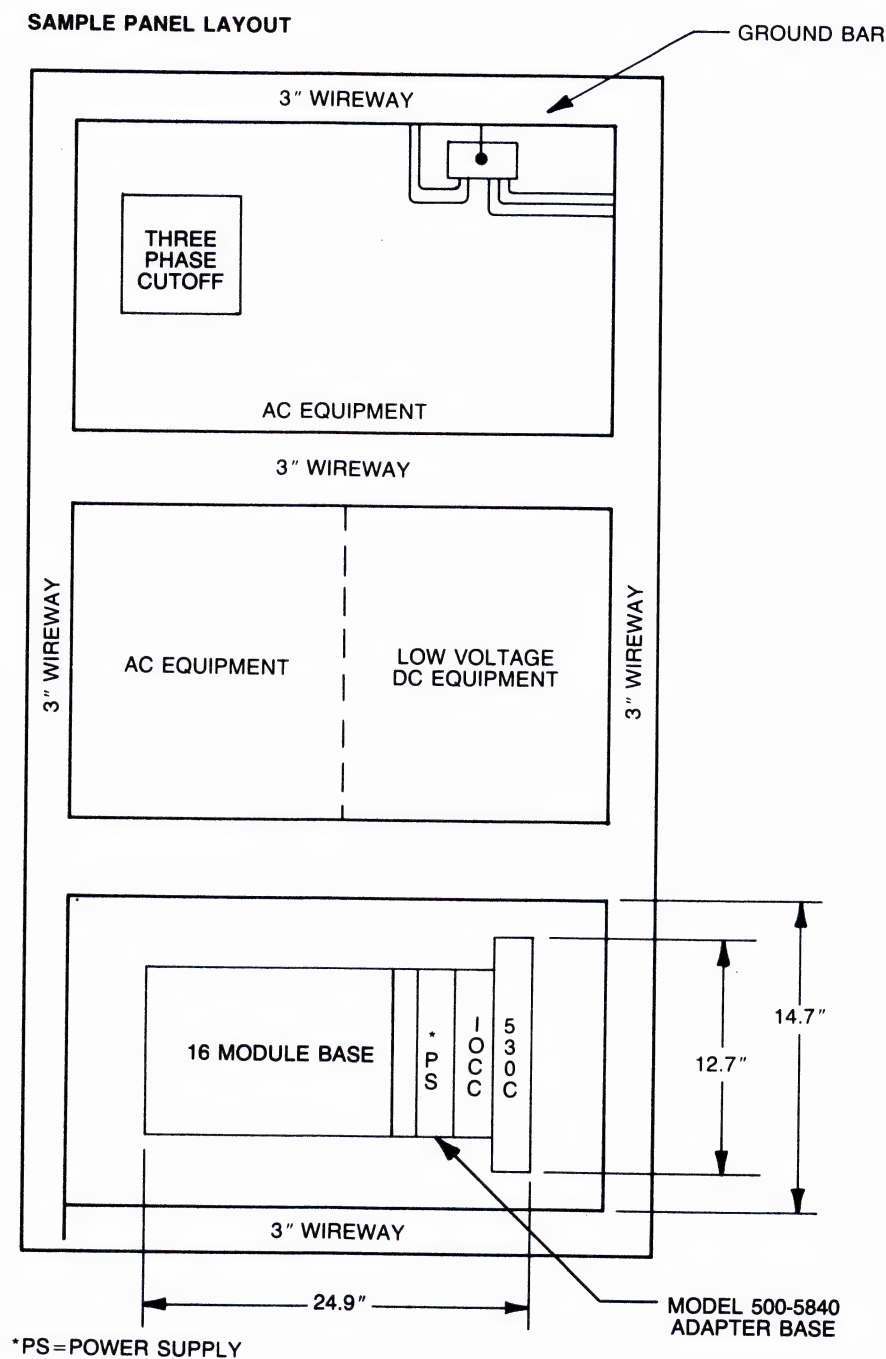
Wireway Layout for Model 500-5828 Base Assembly with Adapter Base
